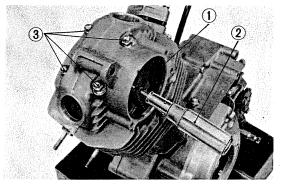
① Cam chain ② Screwdriver ③ 8mm cap nuts
